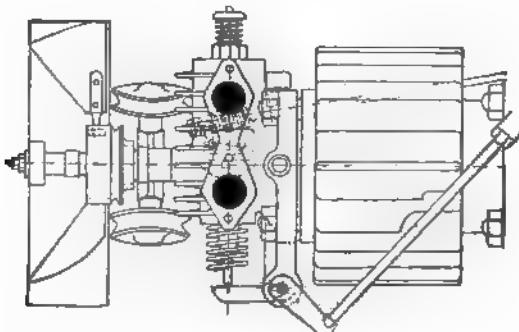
Detail Cylinder Head of the Simms Cycle Engine, showing fan wheel, cooling ribs, and peculiar arrangement for opening the exhaust.
